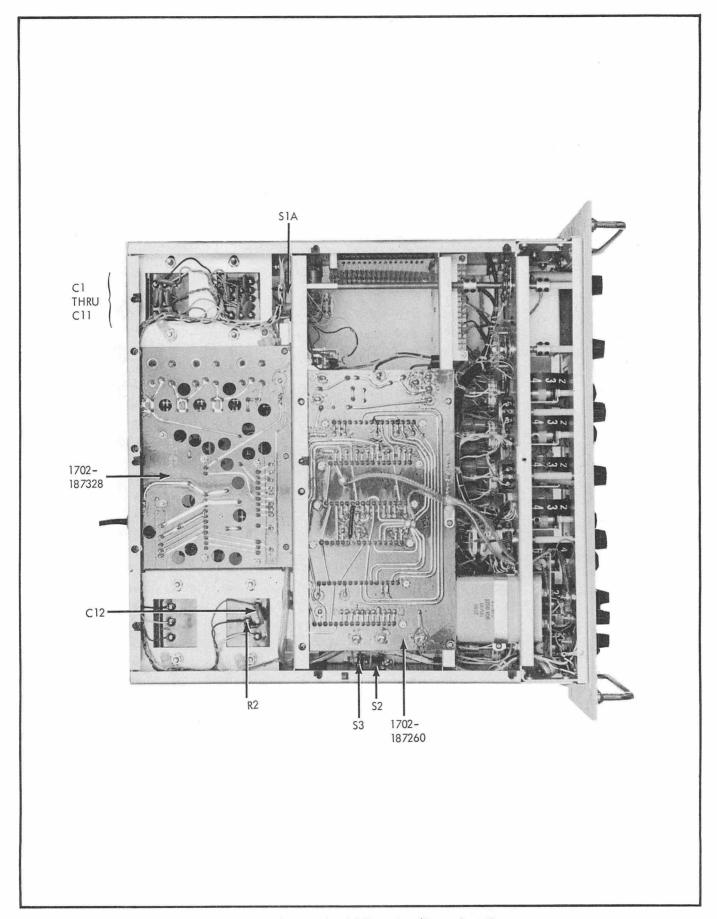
FINAL ASSEMBLY (Sheet 2 of 2)
